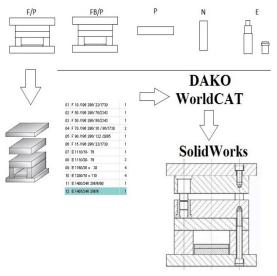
Choosing standard parts for manufacturing of the injection tool
